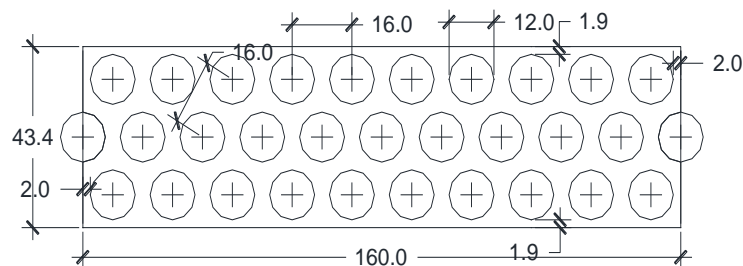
The Detailed Size of Plate B₃ (mm).
